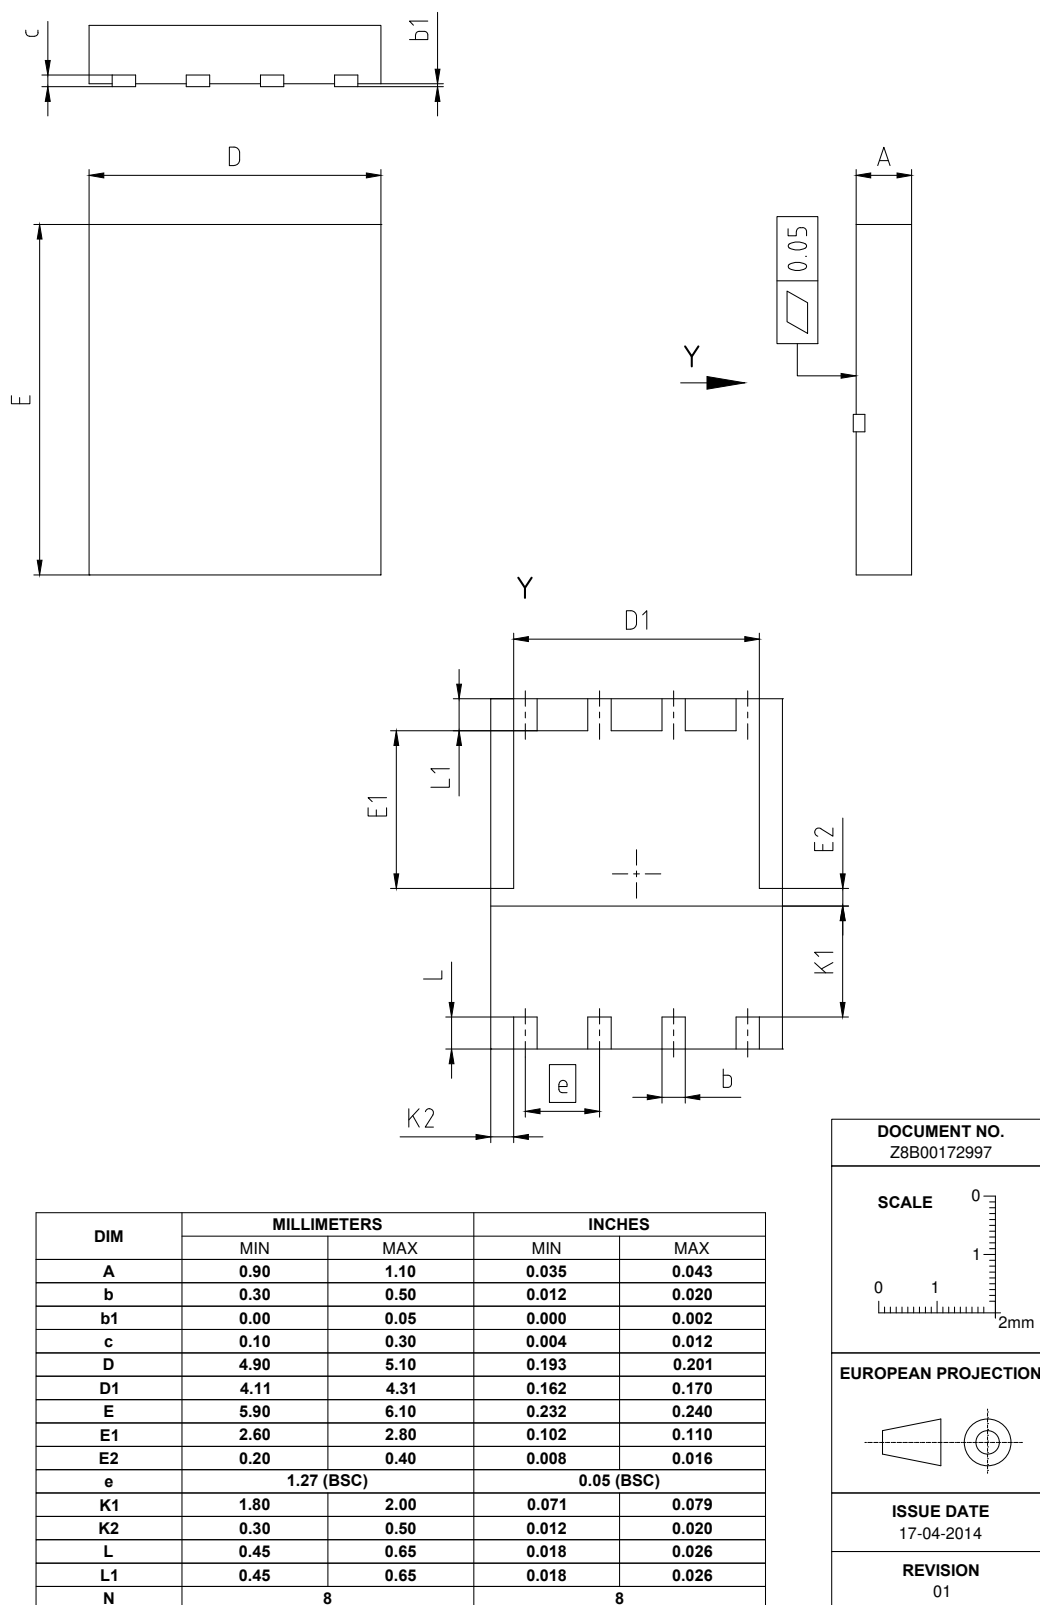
Outline ThinPAK 5x6 SMD, dimensions in mm/inches
